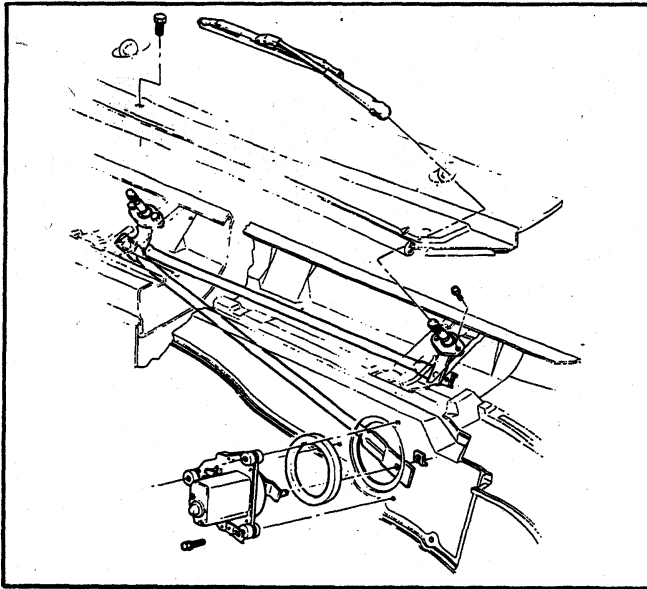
Wiper Motor and Linkage -- Chevelle
